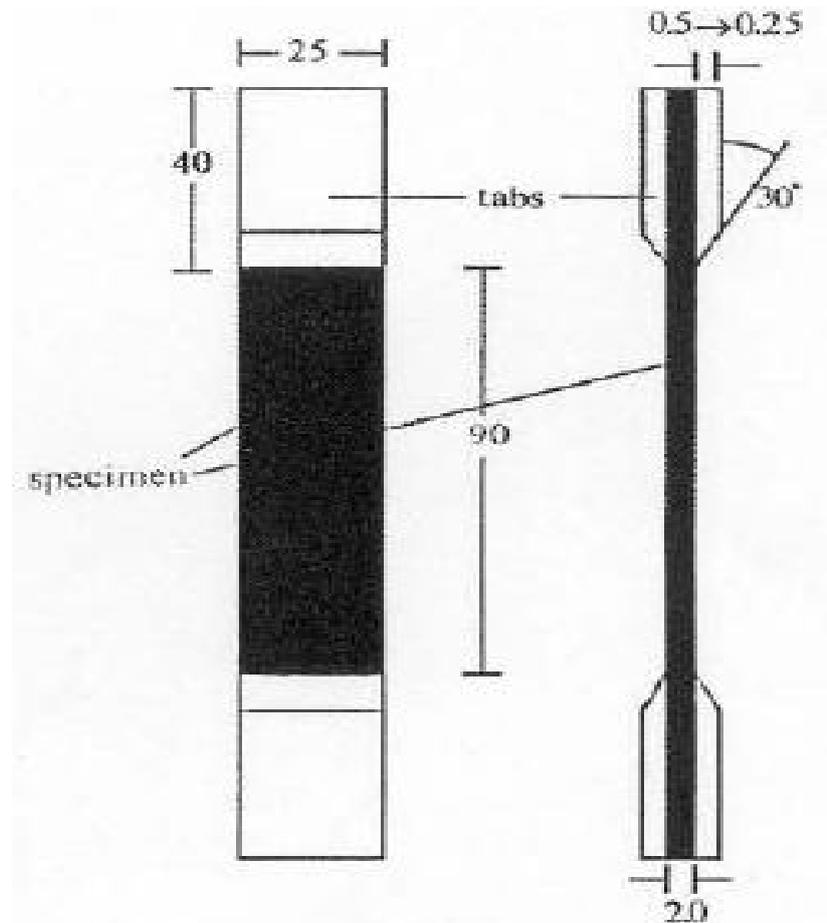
Typical tensile composite test specimen (all dimensions in mm)
